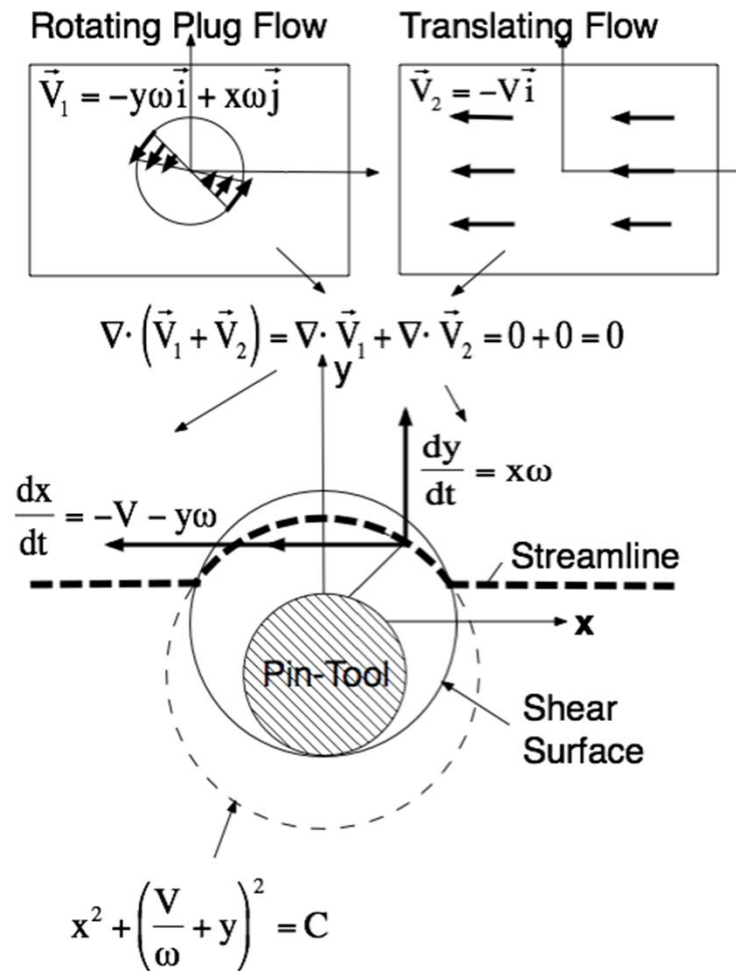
The rotating plug of weld metal sticks to the tool ($\mu P > \tau$) and shears past the stationary weld metal at the shear surface in the simplest FSW model. The part of the weld surface that slips ($\mu P < \tau$) is not part of the rotating plug. The sketch above represents the flared shear surface of an almost fully pressurized conventional FSW tool. As the axial plunge force on the tool is reduced, the sticking surface decreases and the slipping surface increases. At initial penetration with no shoulder contact, the sticking surface may be confined to the bottom of the pin. A relatively slow secondary flow throughout the rotating plug and neighboring weld metal volume may be taken into account in a more elaborate model.
